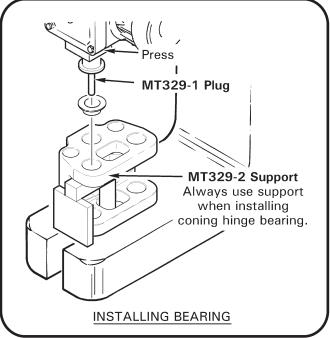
MAIN ROTOR HUB BEARING REPLACEMENT
